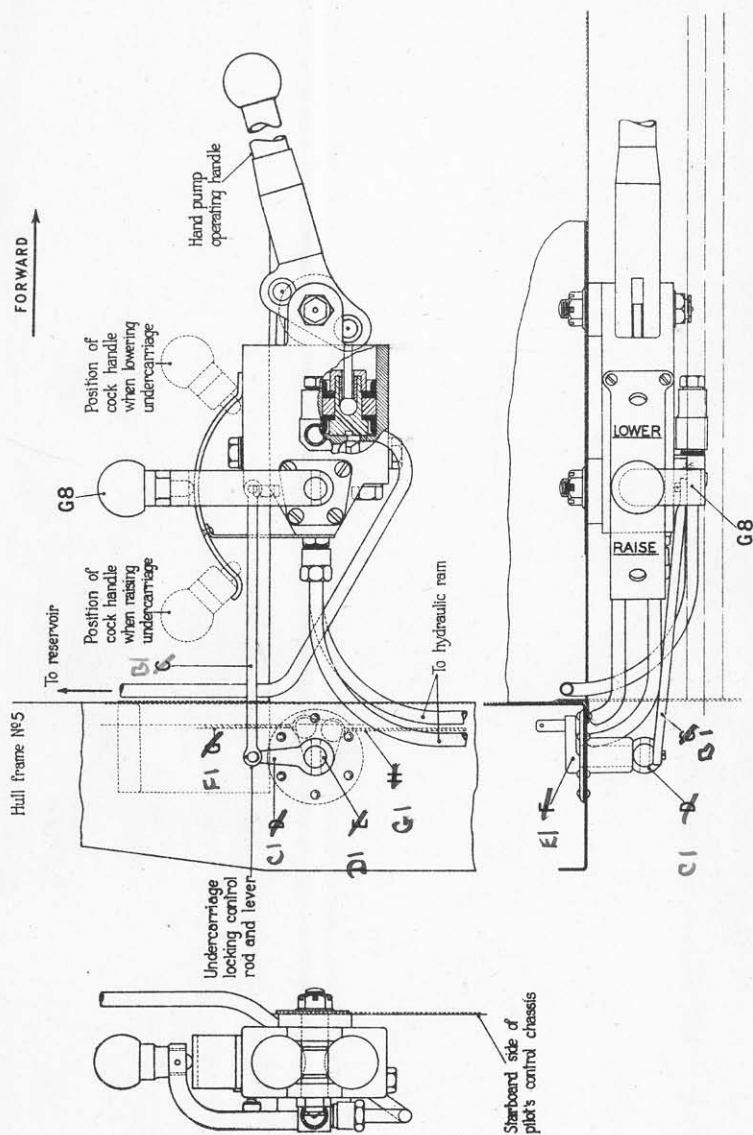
ARRANGEMENT OF HYDRAULIC HAND PUMP FOR UNDERCARRIAGE RETRACTING GEAR
